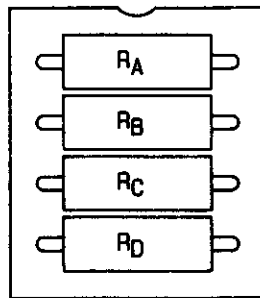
APC MAIN CIRCUIT BOARD COMPONENT LOCATOR
